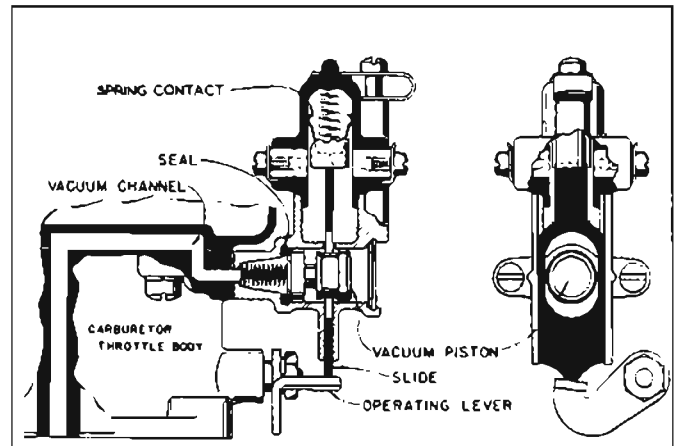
Stromberg Accelerator Vacuum Switch—Engine Running at Closed Throttle
